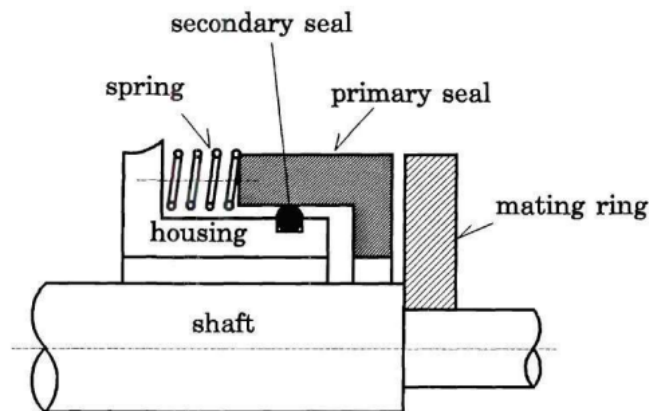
Drawing of a mechanical seal flexibly mounted stator detailing its main components, reprinted from [4]
